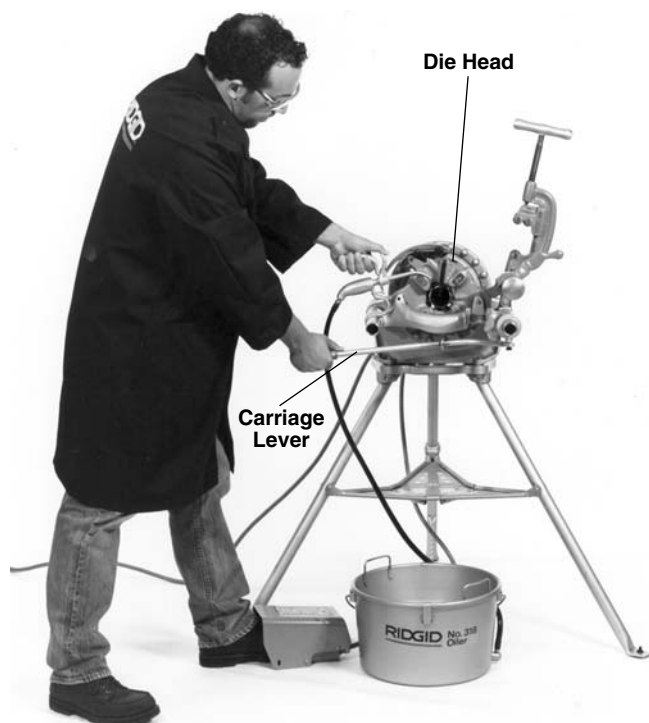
Threading Pipe with Quick or Self-Opening Die Head
